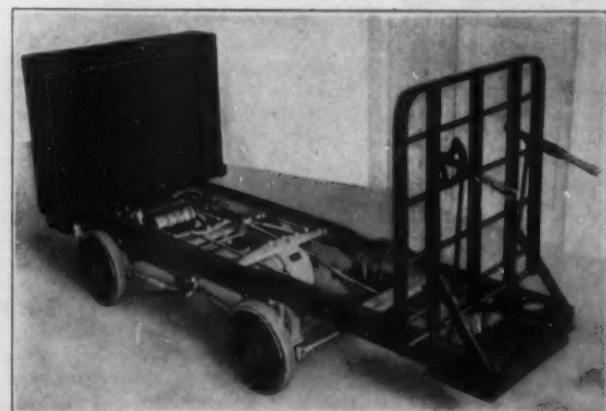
View Showing the Arrangement of the Driving Mechanism.
